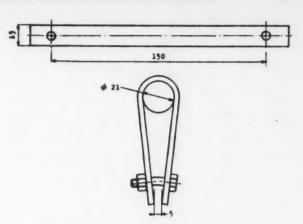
U-Bend Test. Dimensions are given in millimeters.
